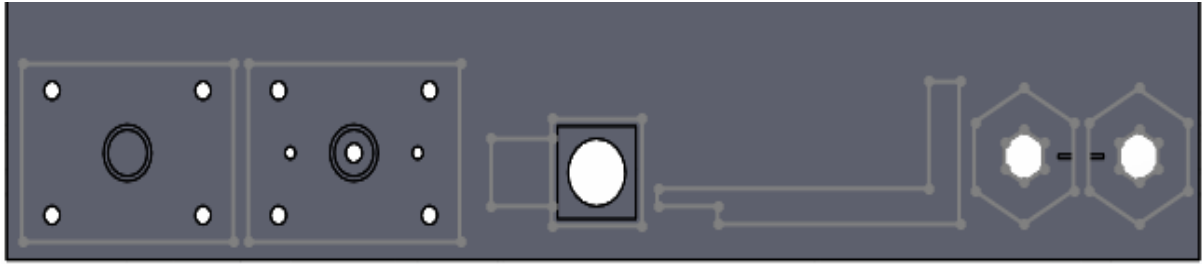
3 SolidWorks Drawing for CNC Machine-1.
